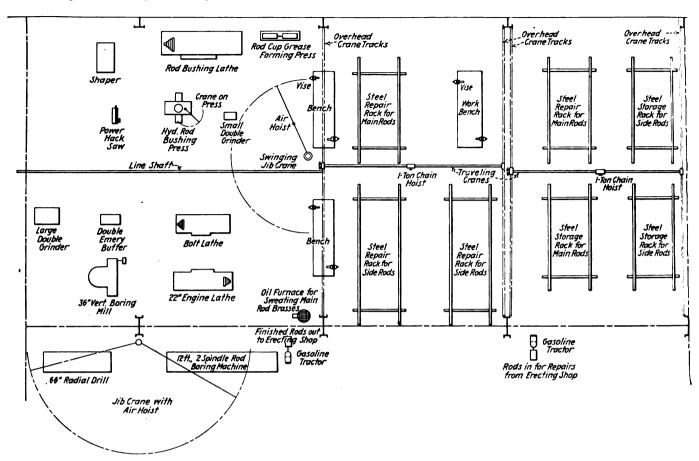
Plan of Rod Department, Showing Machine Layout, Cranes, Work Benches, Repair Racks and Storage Racks
